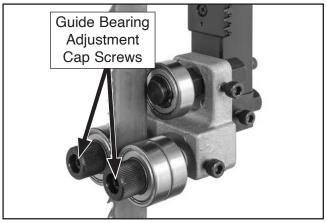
Location of upper guide bearing adjustment cap screws (guide post cover removed for clarity).
